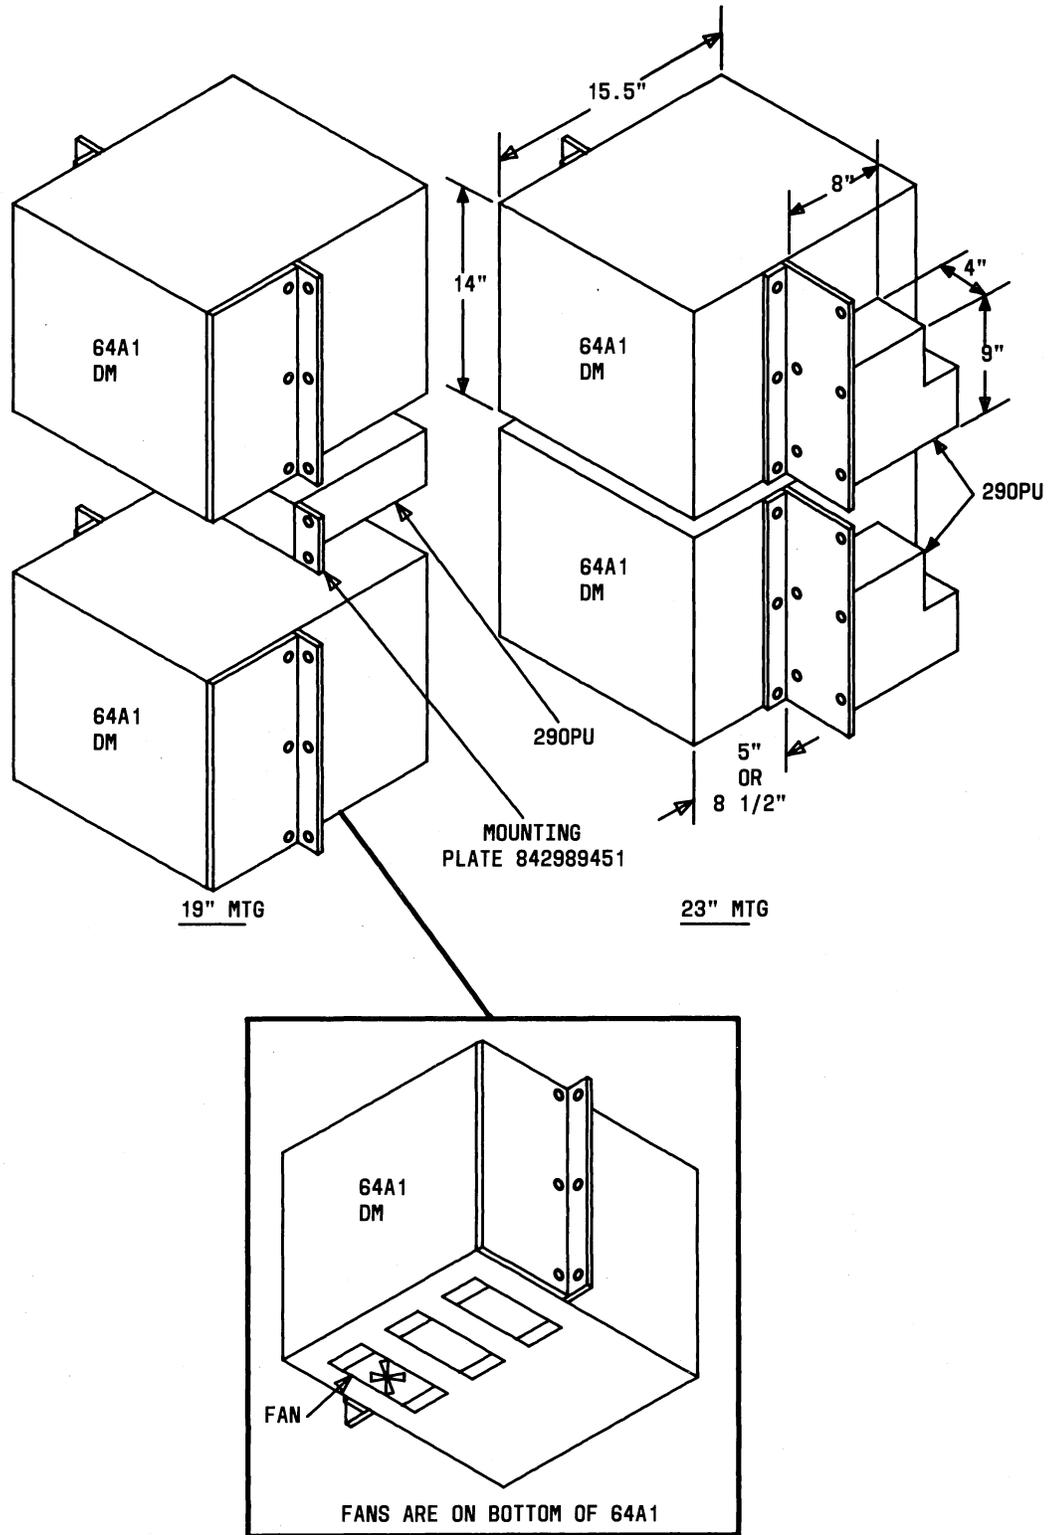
Location of Transformer Brackets in 19- and 23-Inch Mounting
